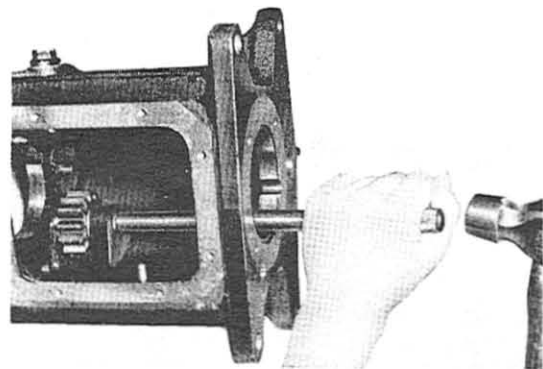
Removing Reverse V0446 Idler Gear Shaft
